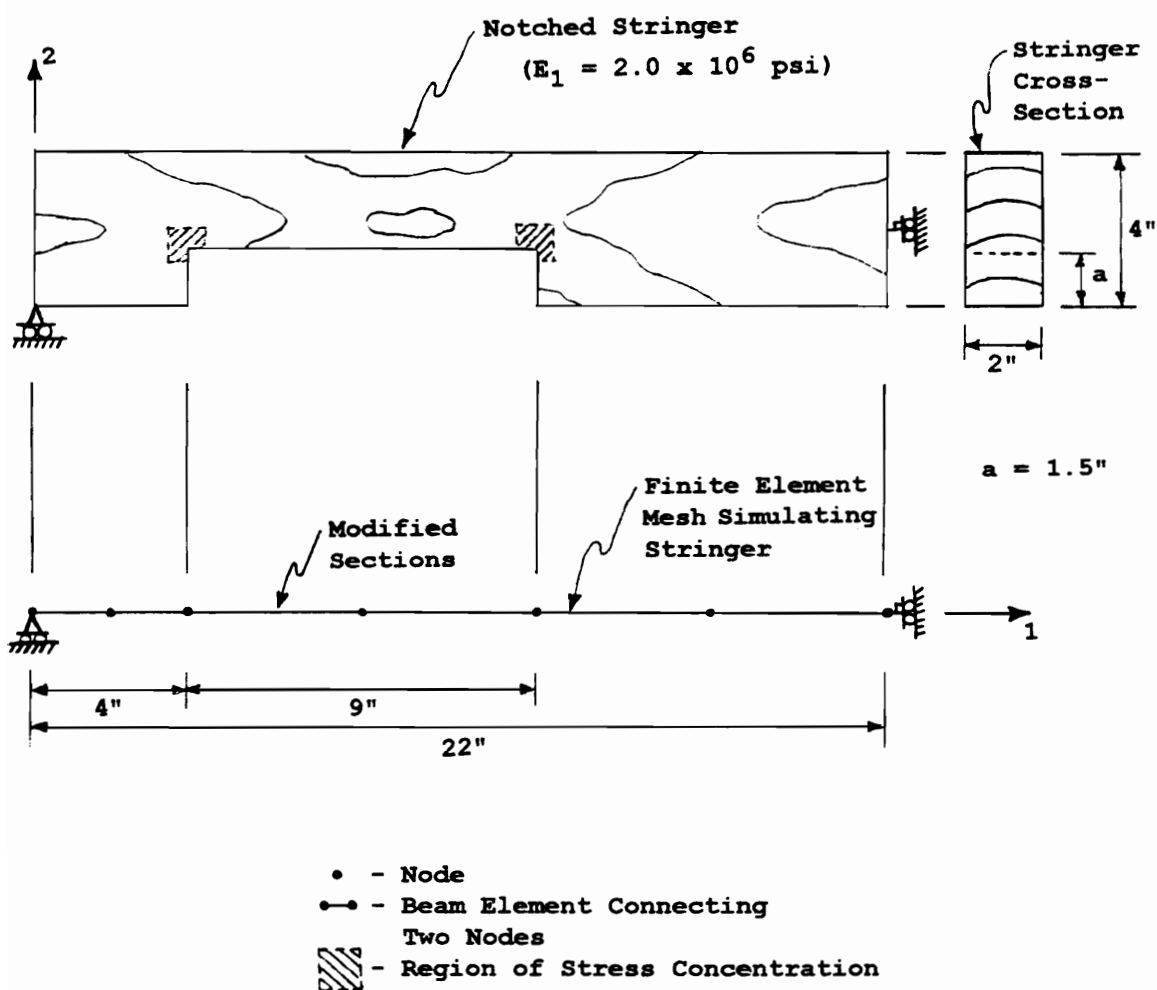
Notched Stringer used in Conjugate Beam Example.
